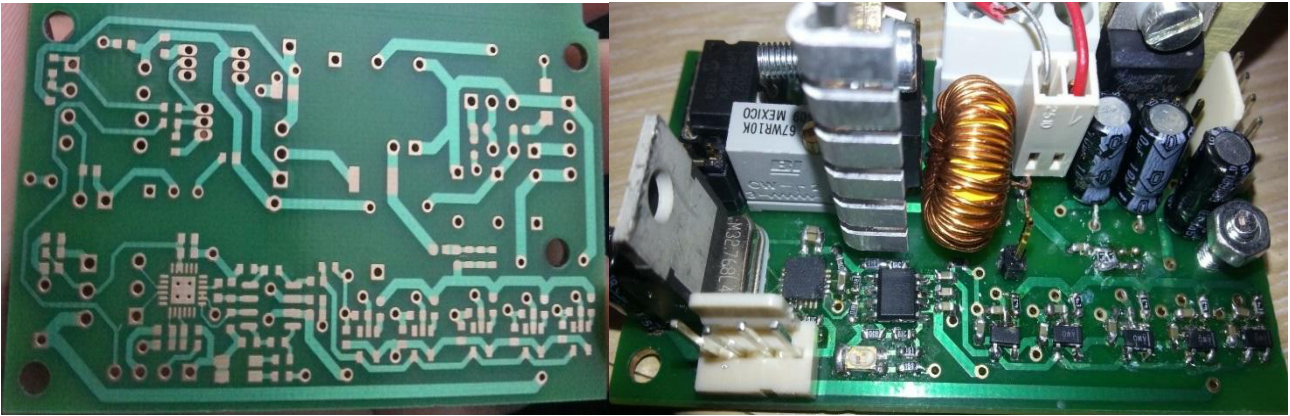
Showing photographs of both the bare and fully assembled laser driver PCB.
